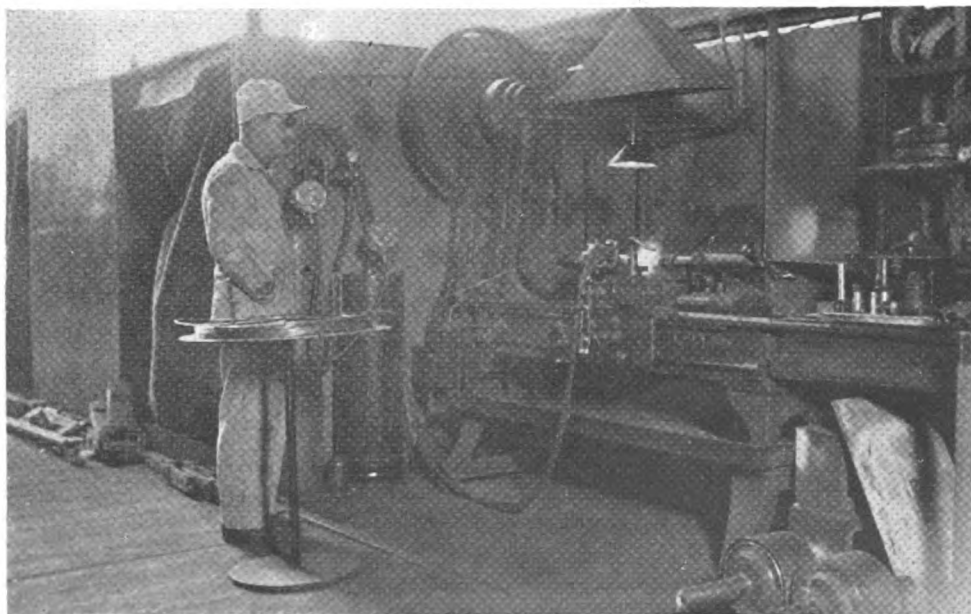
Spraying tubing for Worthington feedwater-pump piston rods, which is reclaimed at 10 per cent of its original cost.—Note the exhaust hood above the lathe and the blasting cabinet behind the operator
